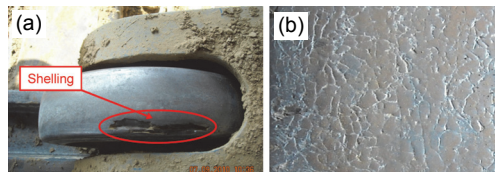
Track wheels damages: (a) shelled tread; (b) cracks on the tread [3]
